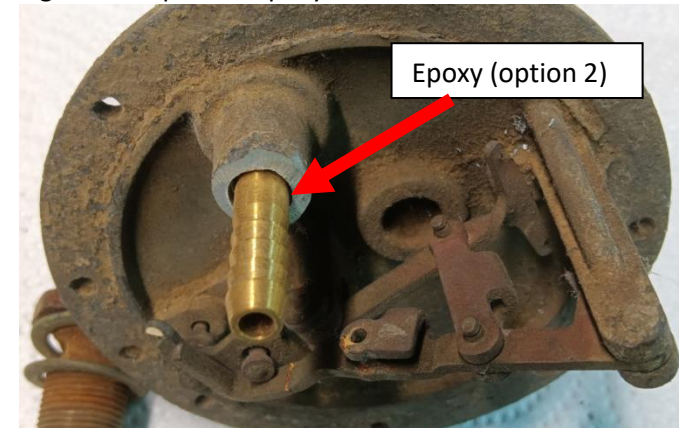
Outlet modification. Fitting of your choice and extension tube
